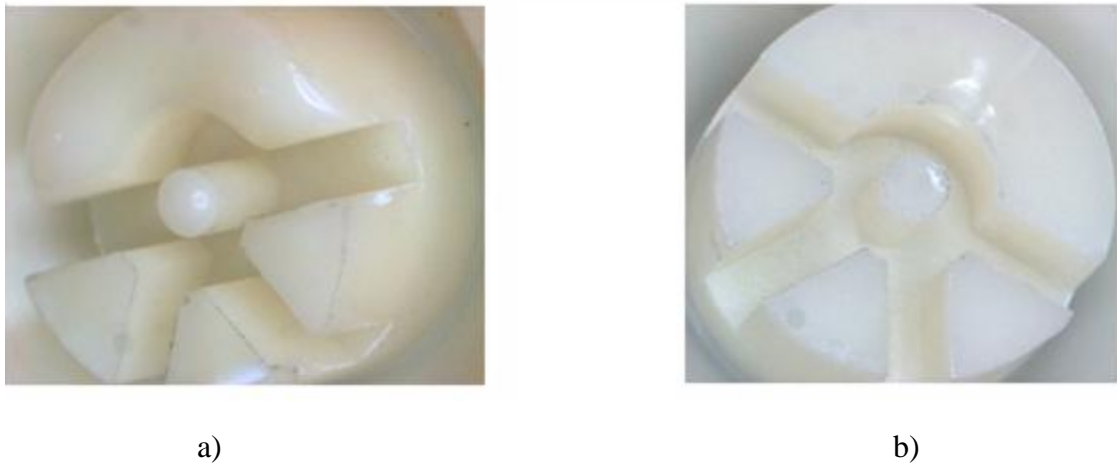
Parts with incomplete mold fill (visible short shots), embossed at different temperatures: a) 120°C and b) 160°C.
